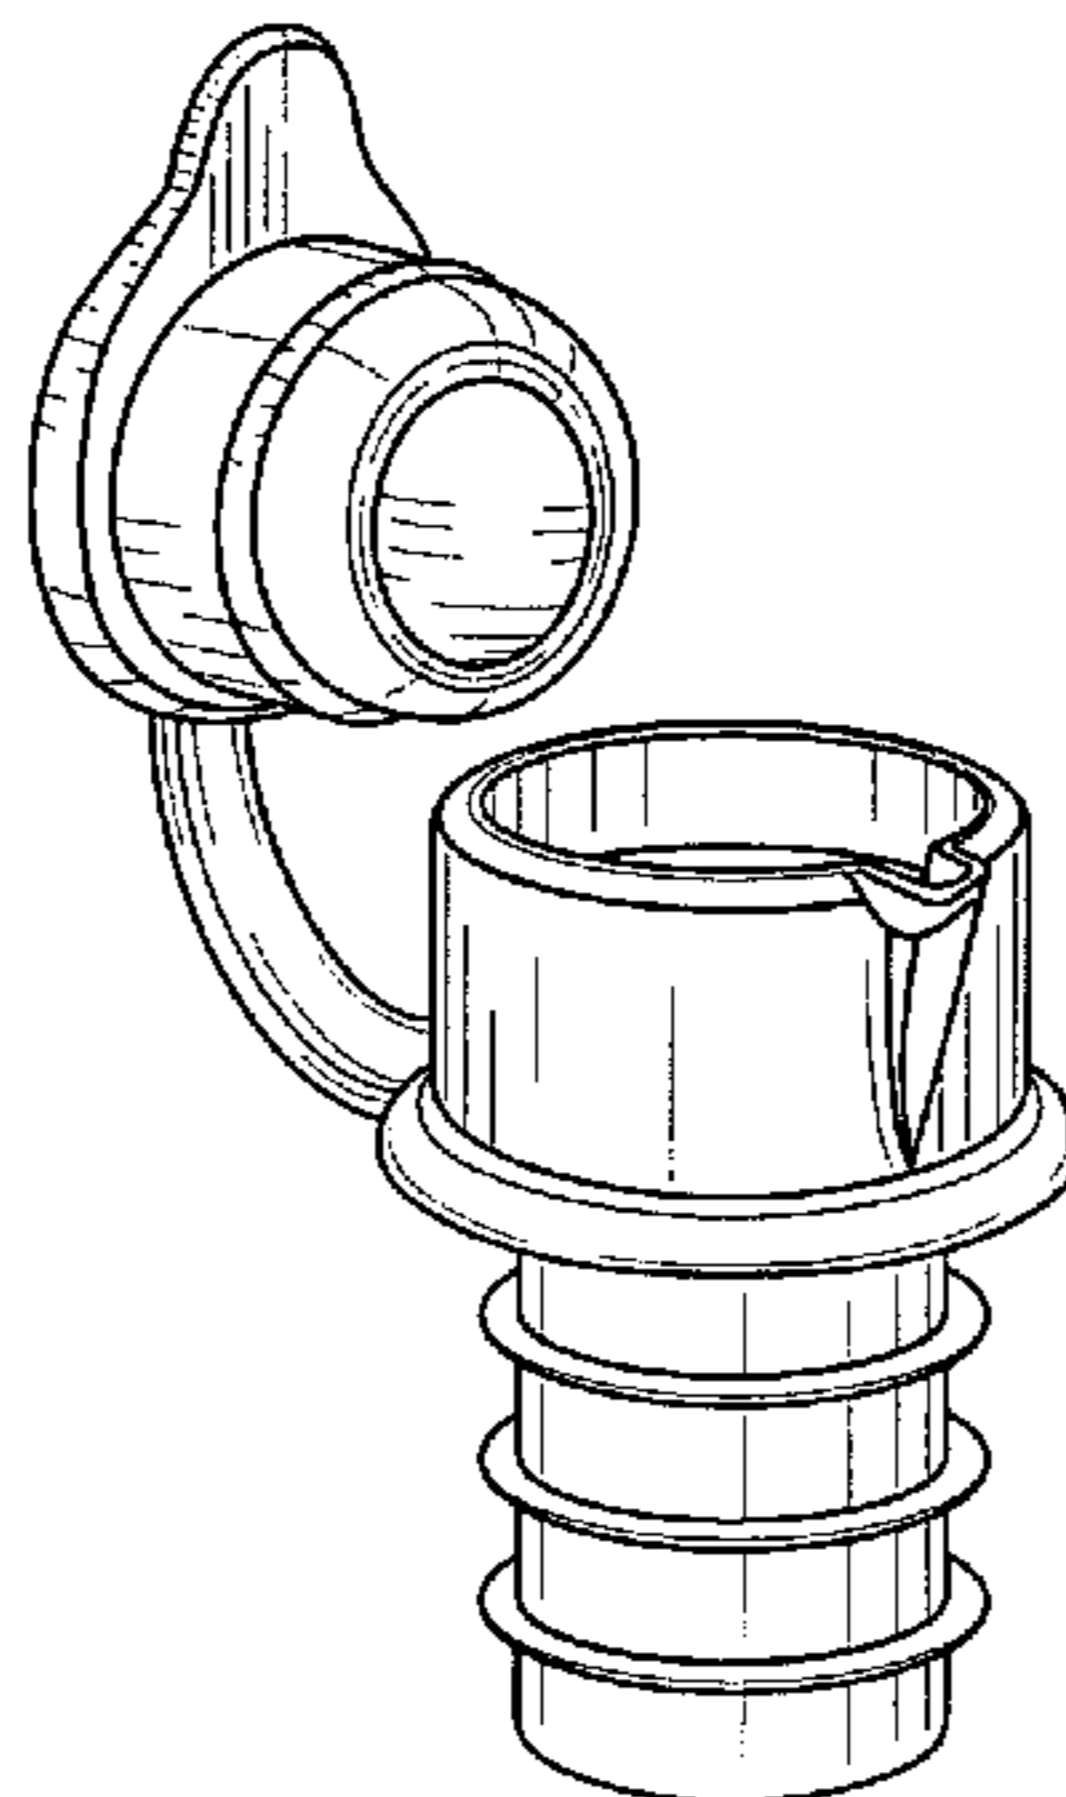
is a perspective view of another embodiment of a reusable bottle stopper in the opened position;
